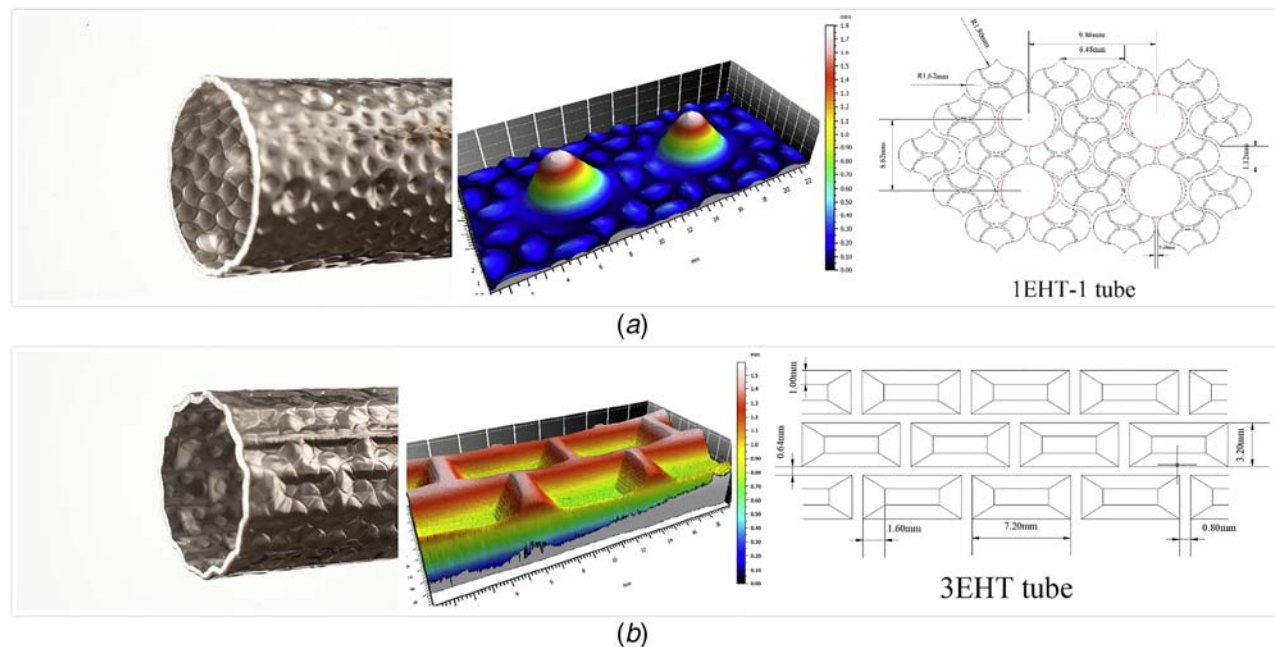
Views of the inner surface and outer surface of the (a) 1EHT tube and (b) 3EHT tube
